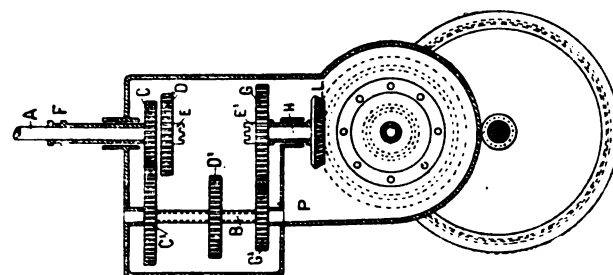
SIDE ELEVATION OF VARIABLE-SPEED GEAR.
